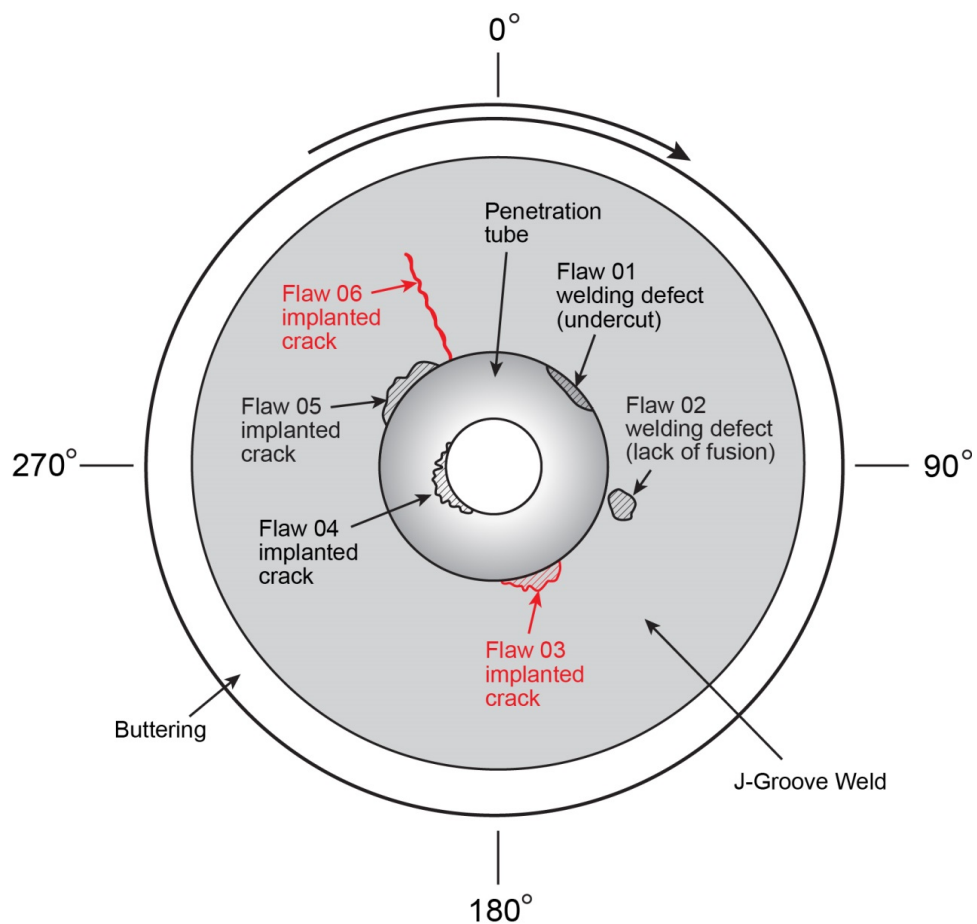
Top View Illustration of the True State Used for J-groove Weld Surface Testing of PINC Test Block 5.3 (PARENT Test Block P26) in PINC. The true state used in PINC is emphasized with red shading of Flaw 03.
